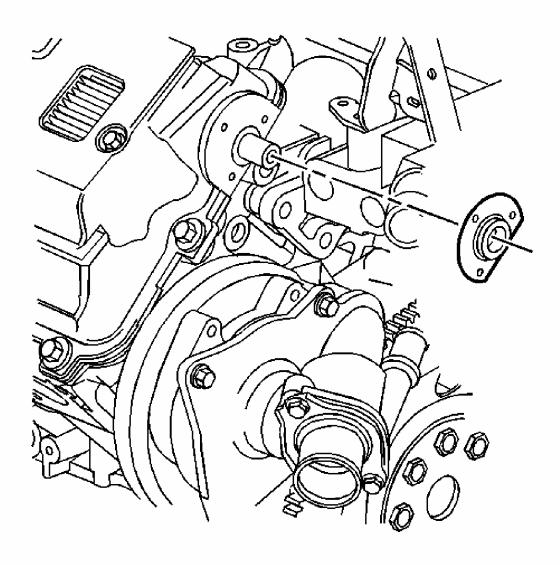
View of Camshaft Seal Courtesy of GENERAL MOTORS CORP.
